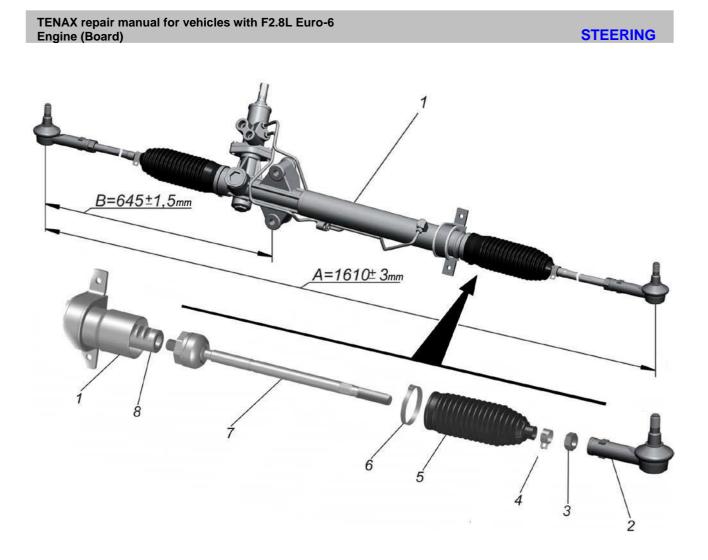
Steering gear: 1 – steering gear; 2 – pivoted tie rod end; 3 – nut; 4, 6 – clamps; 5 – protective casing of internal pivot; 7 – internal pivot assembly with tie-rod arm; 8 – steering rack
